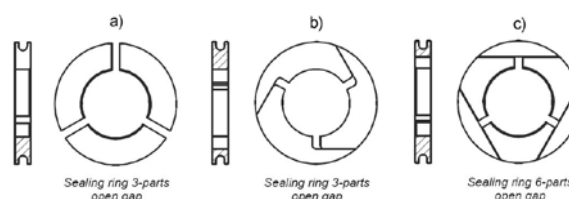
3 different piston rod sealing rings: 3-piece with radial cut (a), 3 piece with tang. cut (b) and a 6 piece ring design
